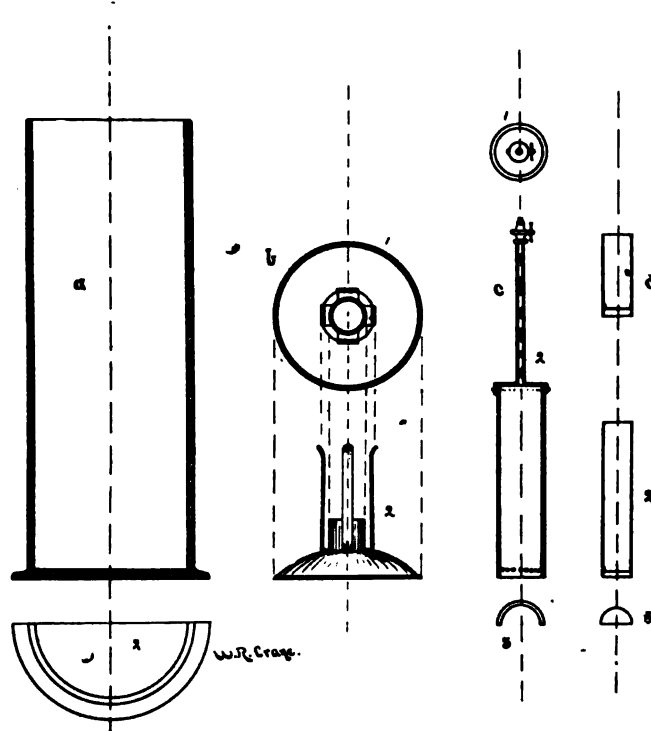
Vertical Sections and Horizontal Plans of Containing Jar, Foot, Valved Cap, and Cartridges of Thompson's Calorimeter.
